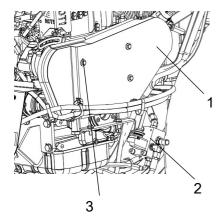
Fig. Engine room 1. Belt guard 2. Hand pump 3. Screw
